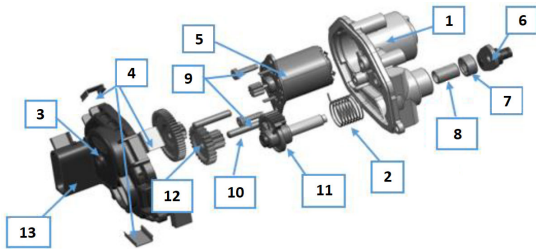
Actuator. (1) Aluminium kinematic housing. (2) Spring. (3) Plastic cover. (4) Clip – 5pcs. (5) CMD engine. (6) Output lever. (7) Gasket. (8) Roller. (9) Screws. (10) Pins – 2pcs. (11) Shaft with gearing. (12) Two gears. (13) Connector.
